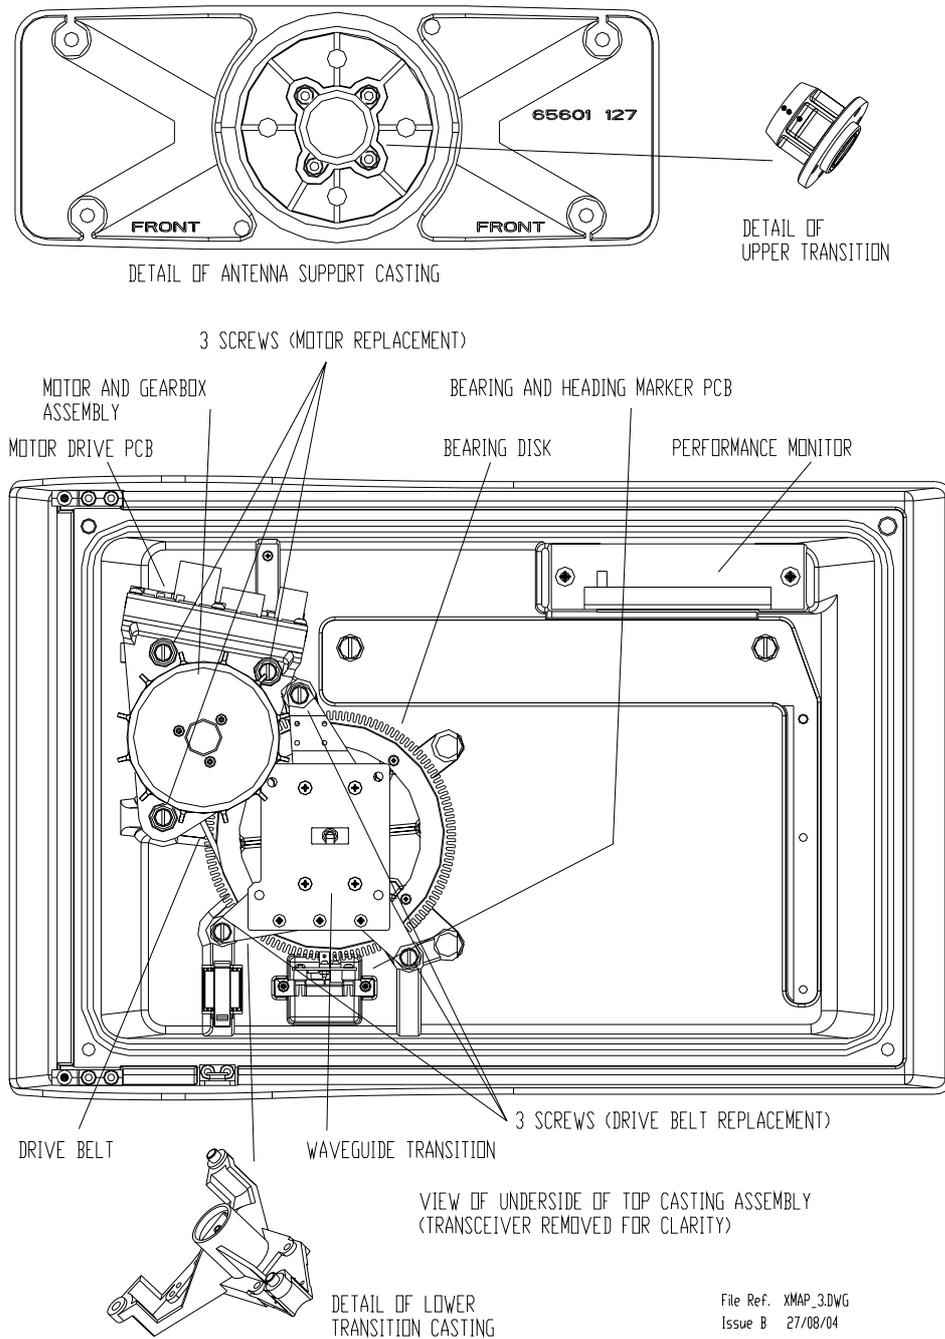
X-Band Masthead Turning Unit – View inside upper casting with Transceiver removed
